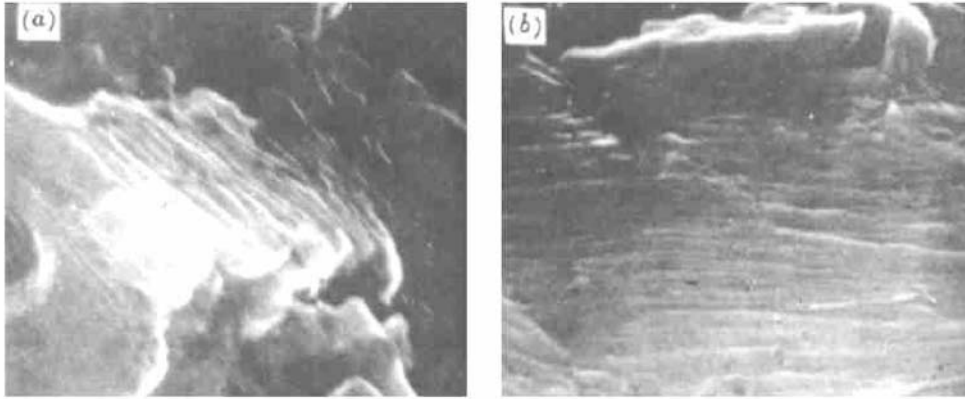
Fatigue fractures of specimens without LSP (a) and specimens with LSP (b)
